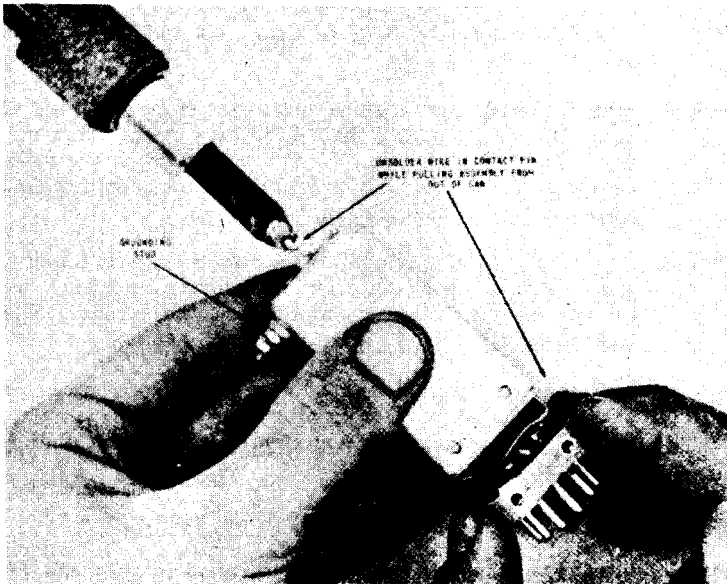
Trigger Amplifier Z-101, Disassembly
